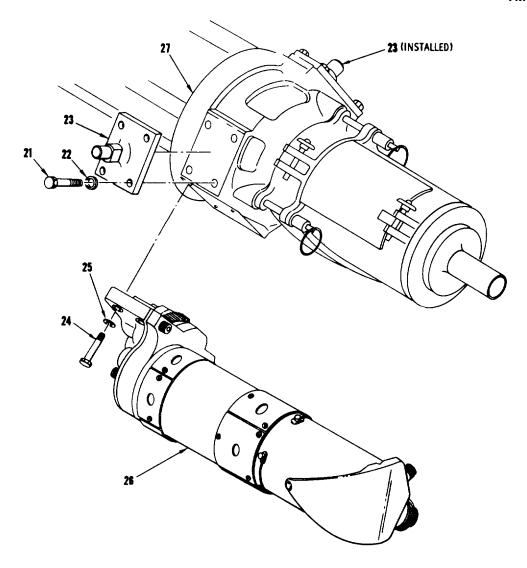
Assembly of gun assembly for installation (sheet 1 of 2).
